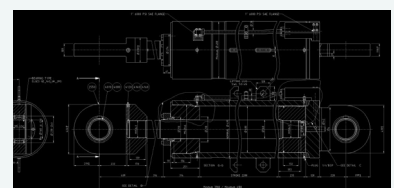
Drawing of the Hydraulic Boom Luffing Cylinder
